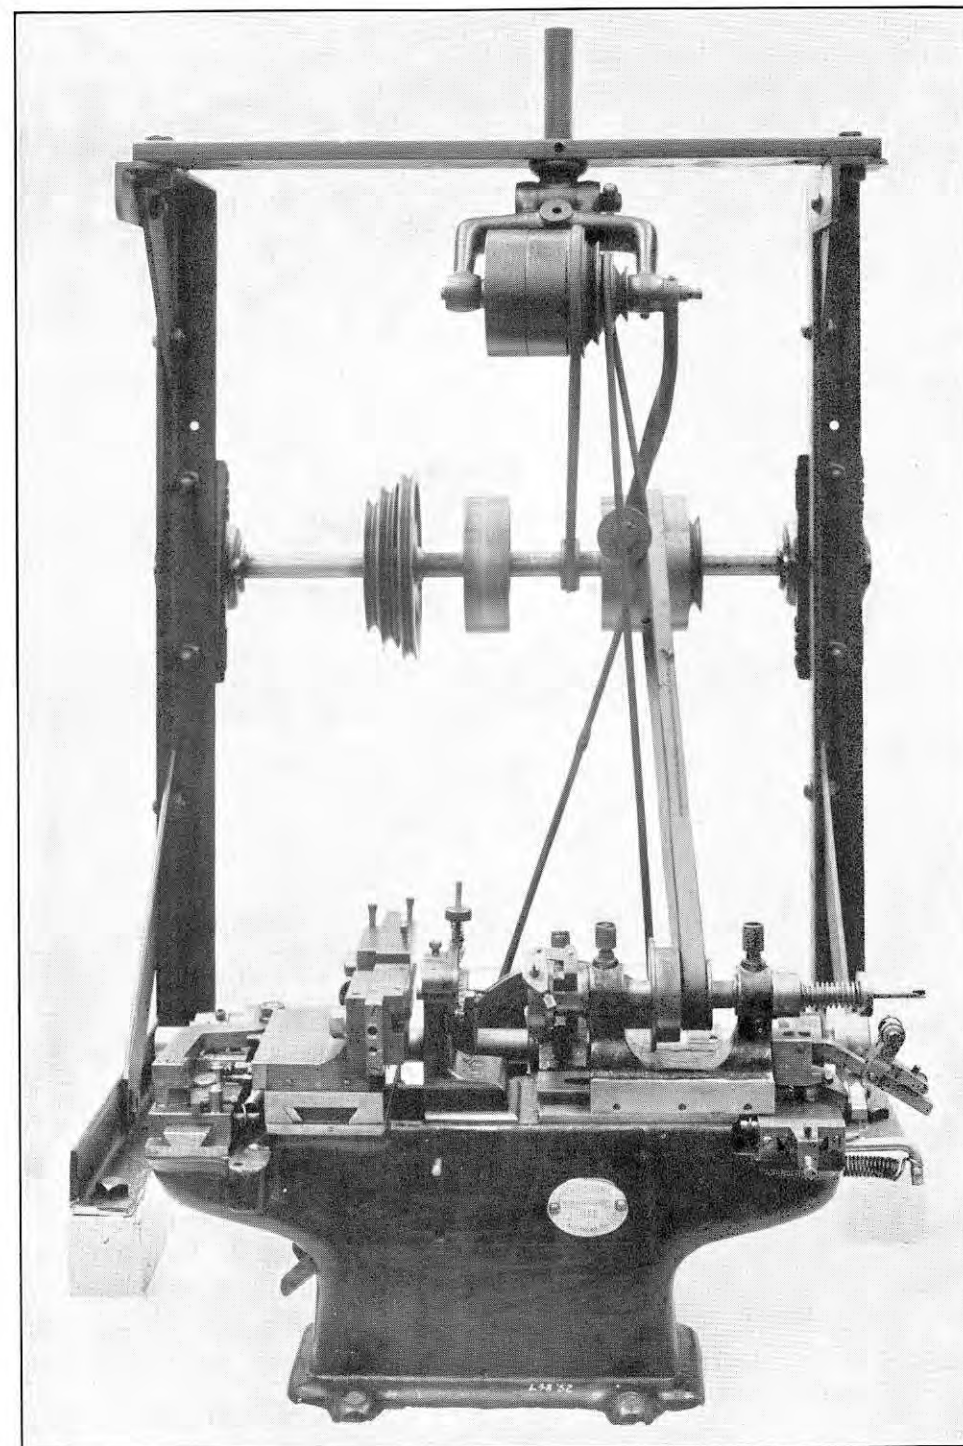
AUTOMATIC LATHE FOR TURNING TAPER PINS.
